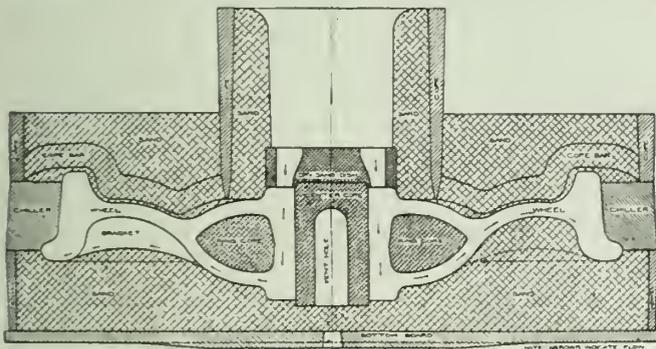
CROSS SECTION OF CAR WHEEL MOLD SHOWING DIRECTION OF FLOW OF METAL.
